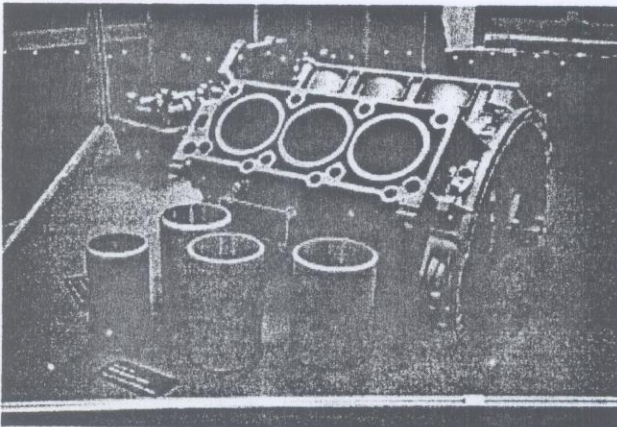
Spray formed aluminum cylinder liners used in combustion engine.
